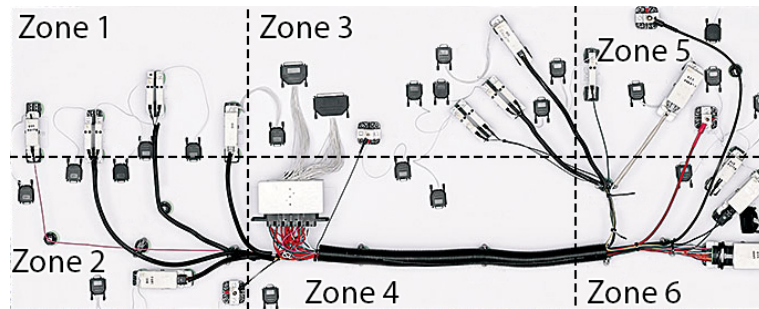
Illustration of the distribution of the fixtures on an assembly table and the definitions of the zones. As the fixtures move according to the assembly tables of the conveyor system, the fixtures are identically placed at every workstation.
